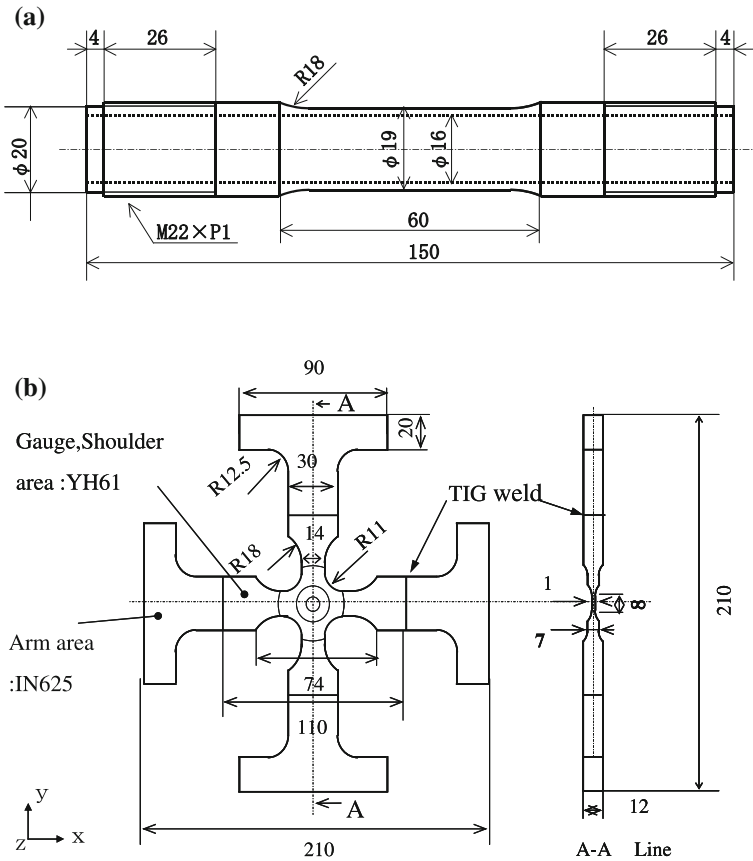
Shape and dimensions of the specimens tested (mm). a Hollow cylinder specimen. b Cruciform specimen
